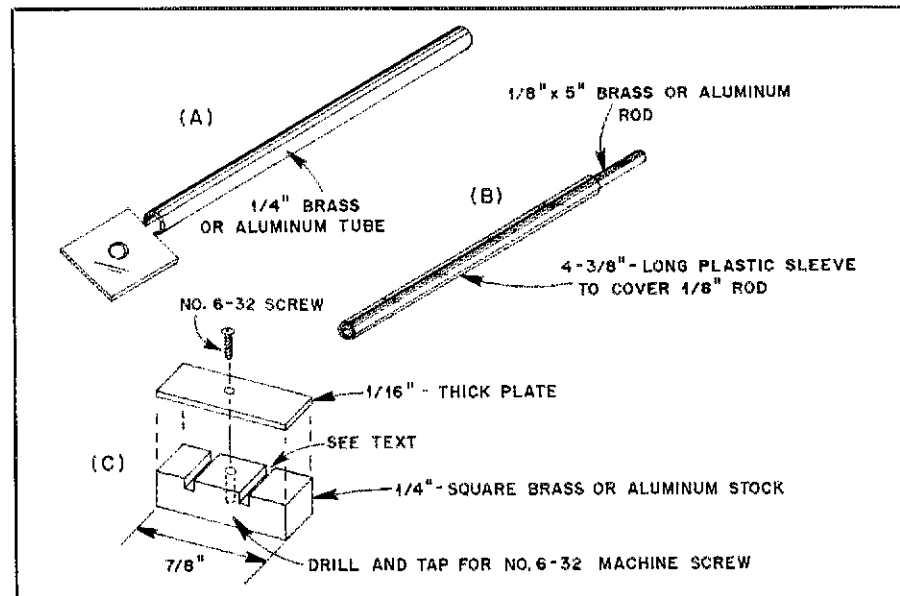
The matching system consists of an outer tube (A), inner rod with insulating sleeve (B) and rod-to-element clamp (C).
